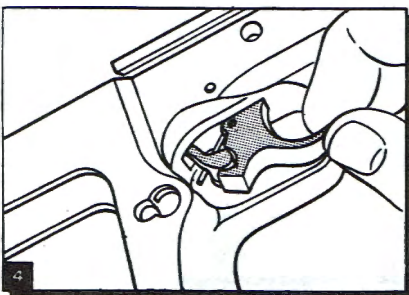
Push trigger pin (GG) out from right to left. Hold the gun with the right side up. With the right hand, pull the trigger forward and upward; this will remove parts (U), (HH), (II), and (OO) as a unit. These parts must be replaced as a unit when reassembling the gun
